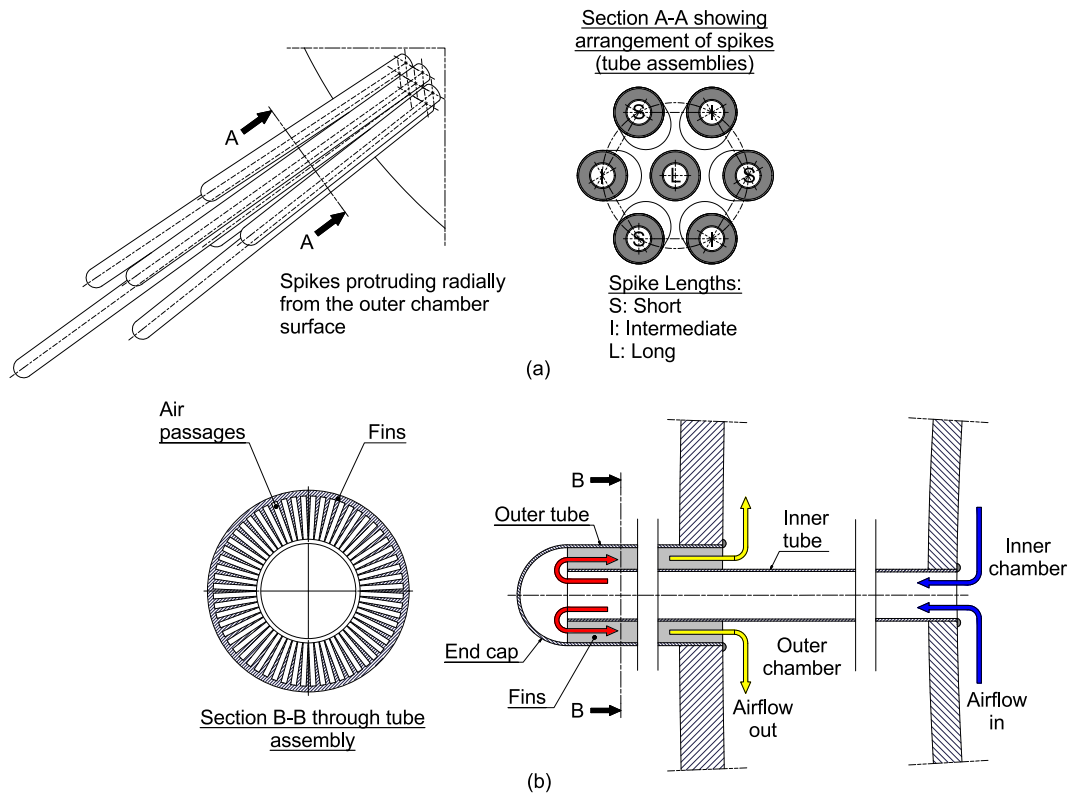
SCRAP tube assembly (spike) details: (a) tube arrangement, (b) tube geometry (Kröger, 2008)
